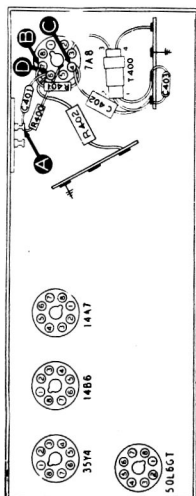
BOTTOM VIEW, SHOWING SECTION 4 TEST POINTS
